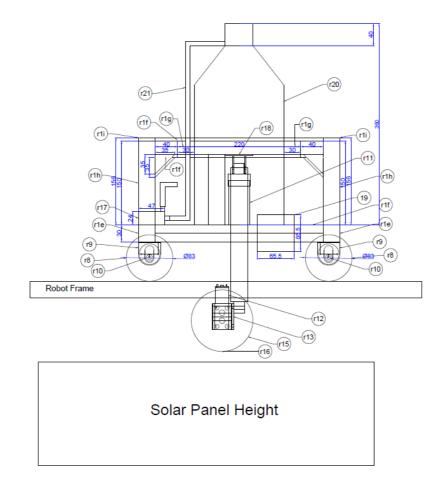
Moving Frame Isometric Drawing – Full View with Components
